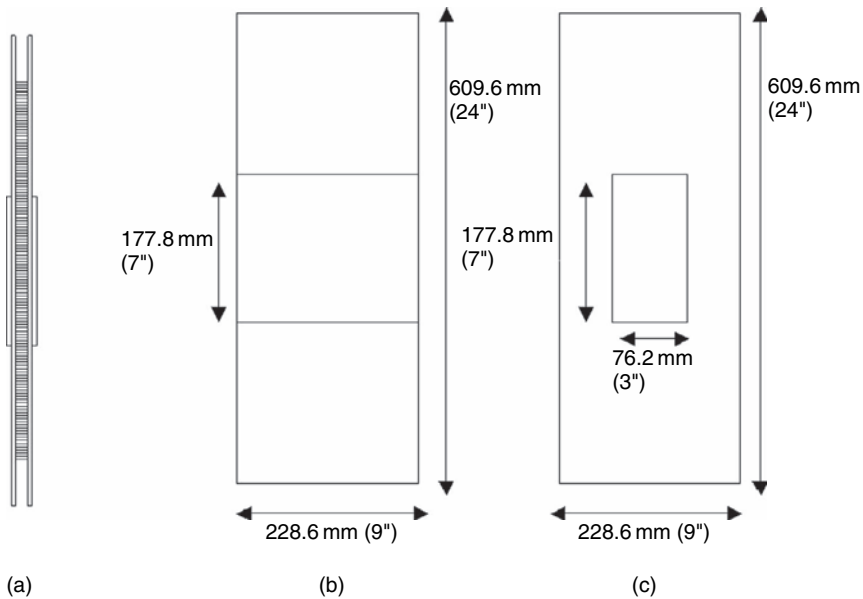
A sandwich configuration of fatigue crack growth specimens: (a) side view; (b) plan view of a specimen with a patch spanning across the full plate's width; and (c) plan view of a specimen with a finite-size rectangular patch.
